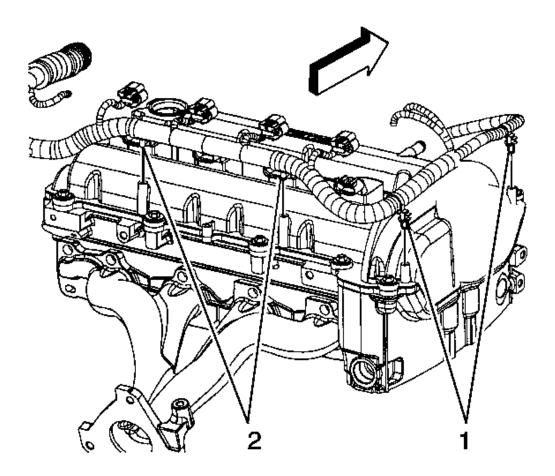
Engine Harness Clip Courtesy of GENERAL MOTORS CORP.
